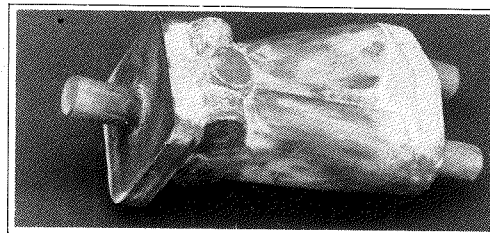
The wooden 'pattern' of the manifold. moulds into which molten metal would be poured to cast the manifolds. To allow for contraction of the molten metal whilst cooling and to prevent the final manifold casting therefore being undersize, the wooden pattern had to be made slightly oversize. In addition, the end flanges were made oversize to allow for final machining.
